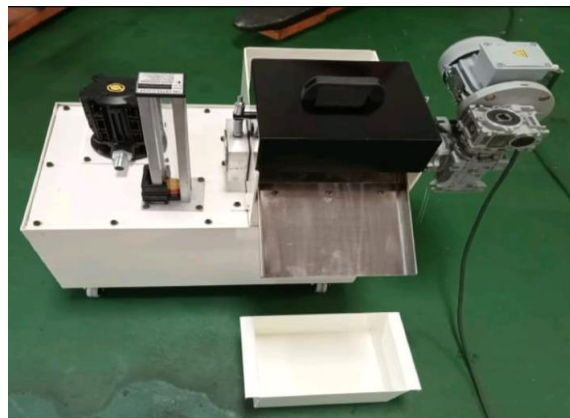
Removing grinding particles from the coolant oil after the grinding process
